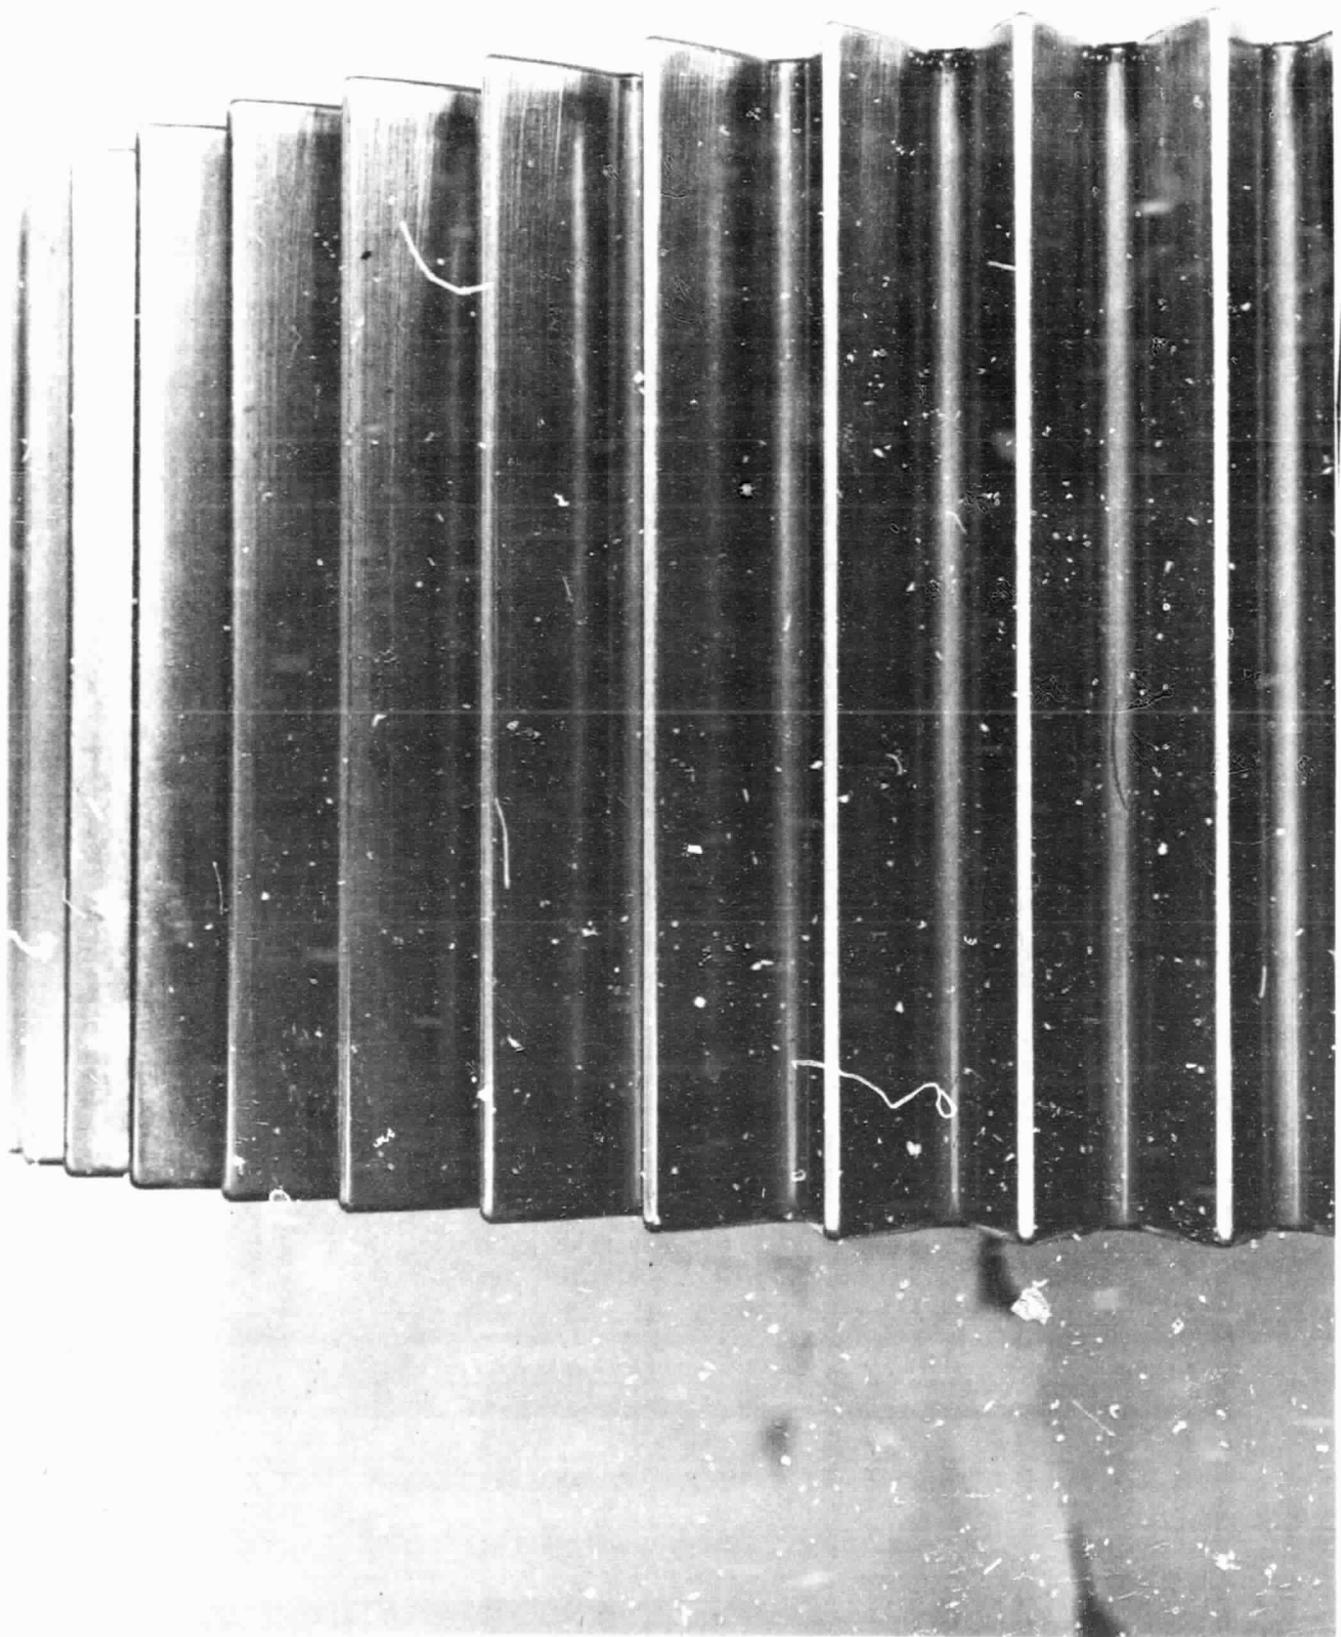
SECOND STAGE PLANET TOOTH SURFACES - SUN GEAR CONTACT
